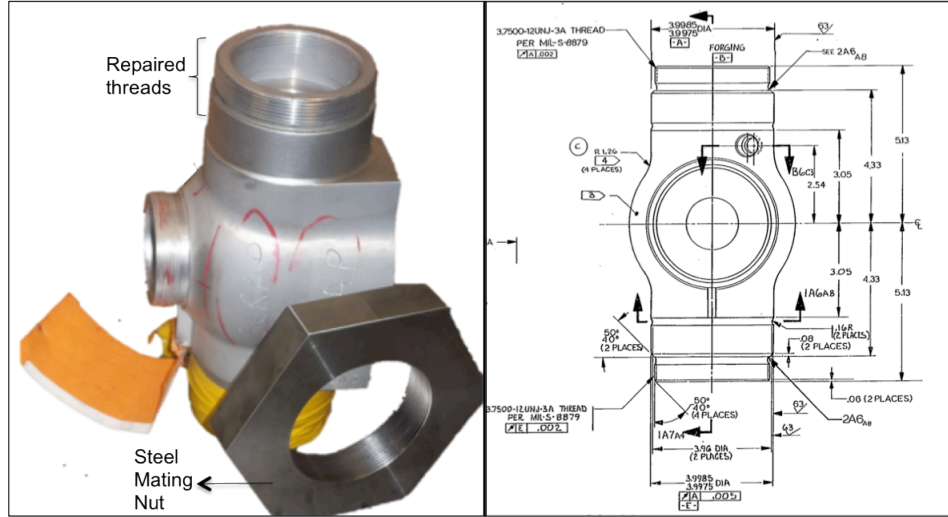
Dimensions of the nose landing gear steering actuator found on the Boeing 757 models².
